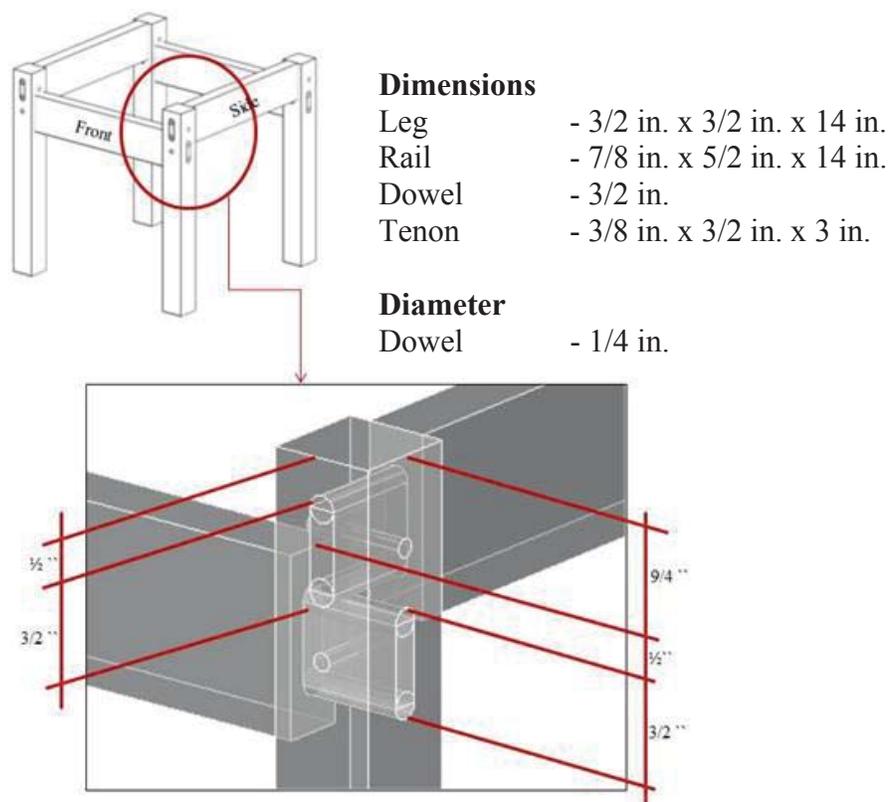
Pinned round-shouldered rectangular mortise and tenon joint frame construction configuration.
